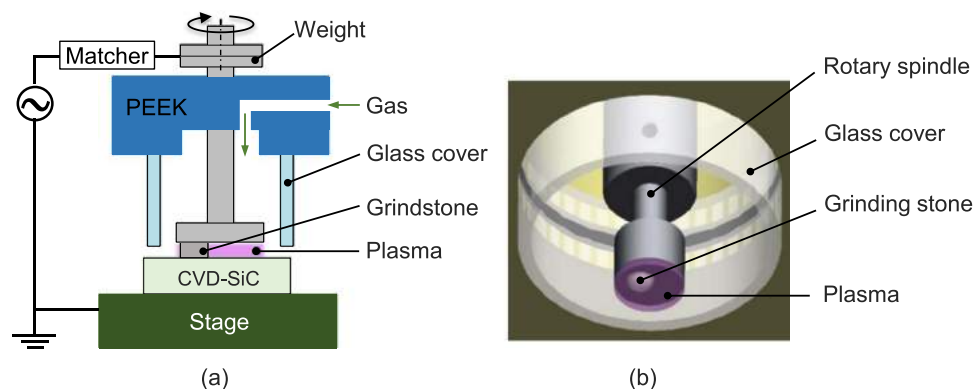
(a) Schematic view of the PAP setup. (b) CAD image of the polishing tool.
